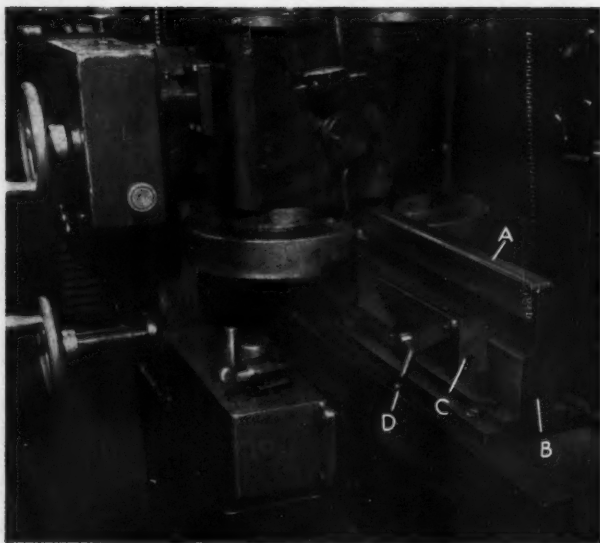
Special optical inspection equipment supplied by O.M.T., Ltd., for checking cam profiles
